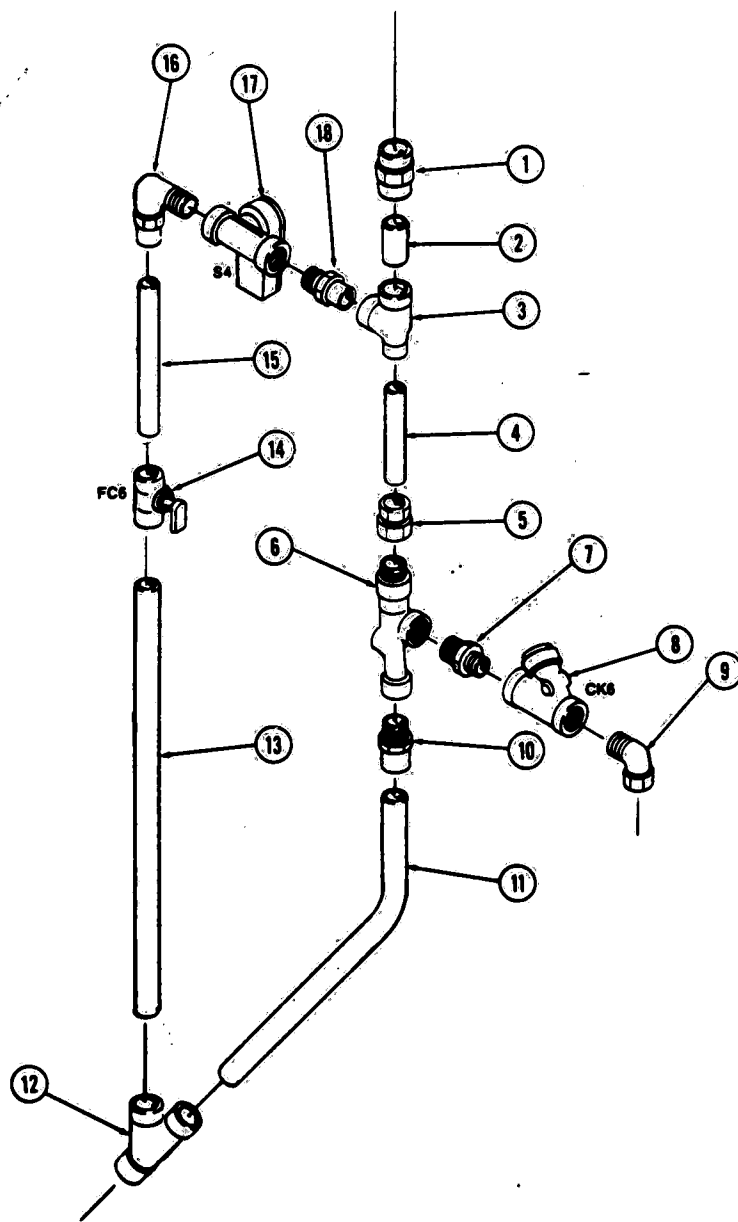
EJECTOR ASSEMBLY - Vacumatic
